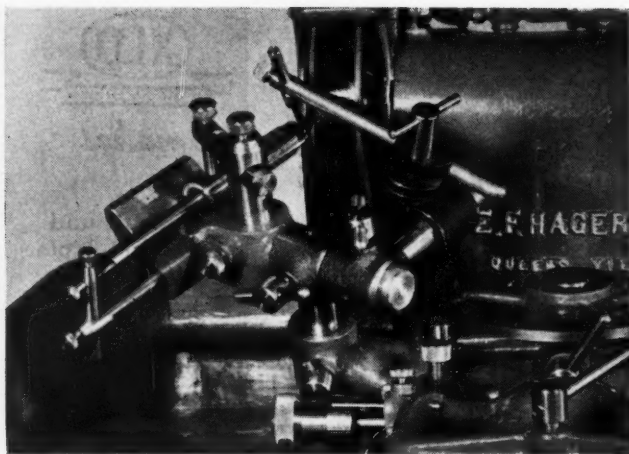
Hager Carbide-tool Grinder with New Attachments Set up for Grinding Special Reamer
